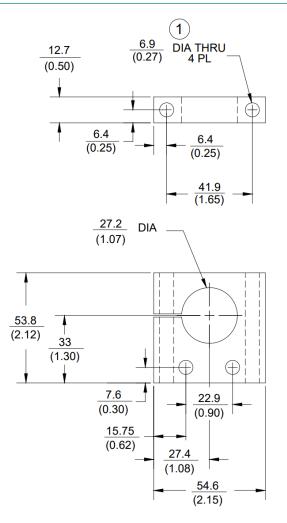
29660-01 Optional Mounting Clamp for -03 and -04 Smooth Case types only
